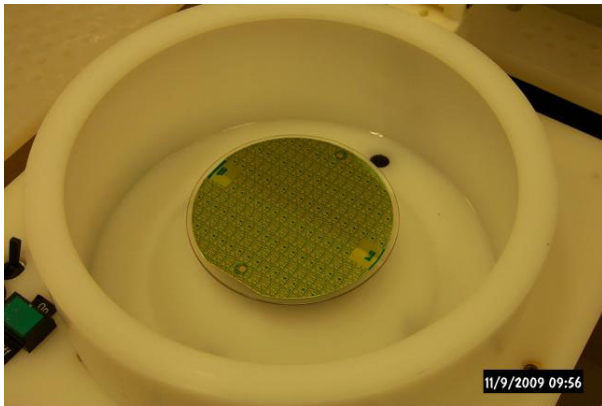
wet chemistry spinning tool with thin wafer clamped by the MEC
